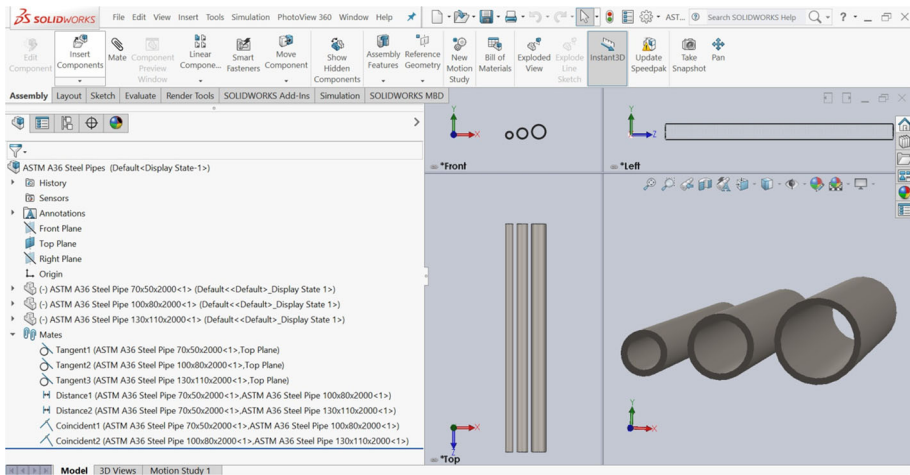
Selected ASTM A36 Steel pipes (Types 1a, 2a, 3a) in a 3D SolidWorks CAD system environment
